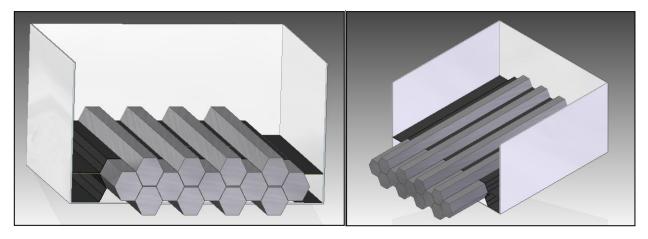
Use of supporting walls and weights for constructing of honeycomb block
